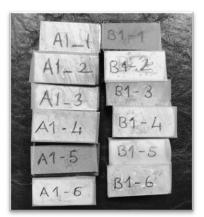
The samples obtained from cutting blades via Laser Cutting Machine.
